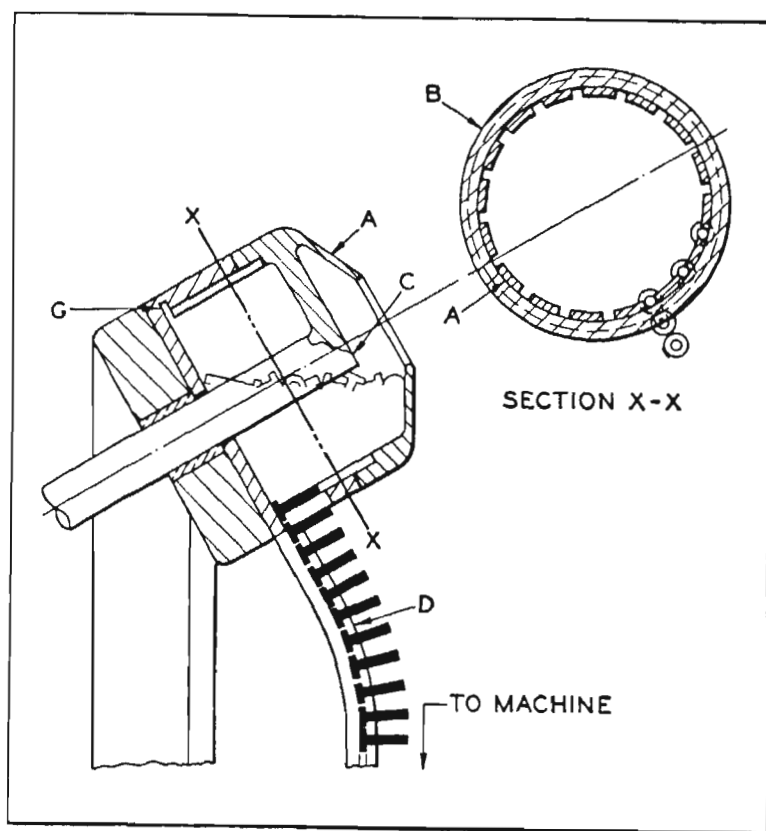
Hopper for Feeding Rivets and Similarly Shaped Parts.
